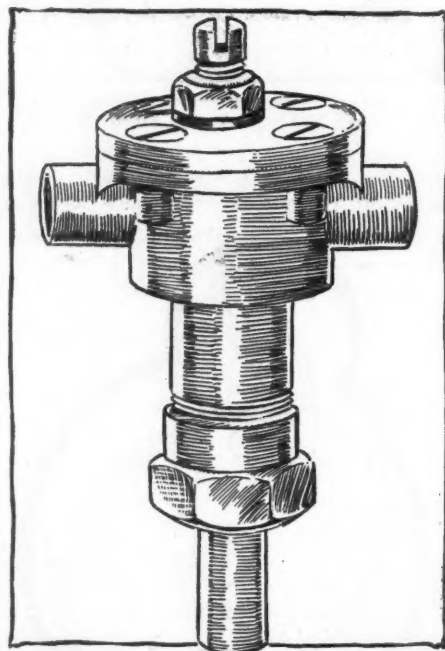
OIL PUMP USED WITH PEDERSON LUBRICATING SYSTEM
